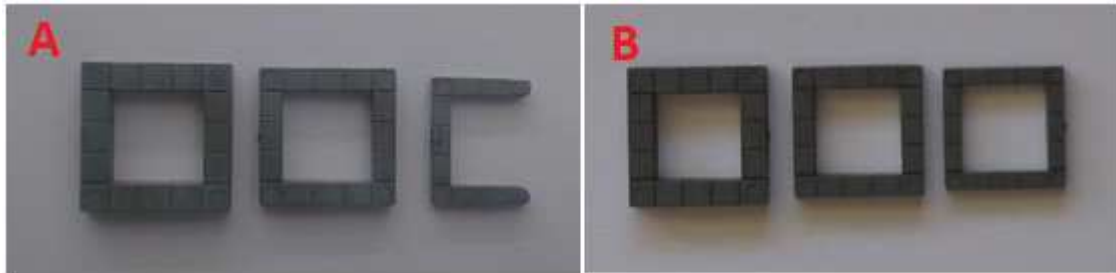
Injection molded testing samples: a - short shot, b - optimized.
